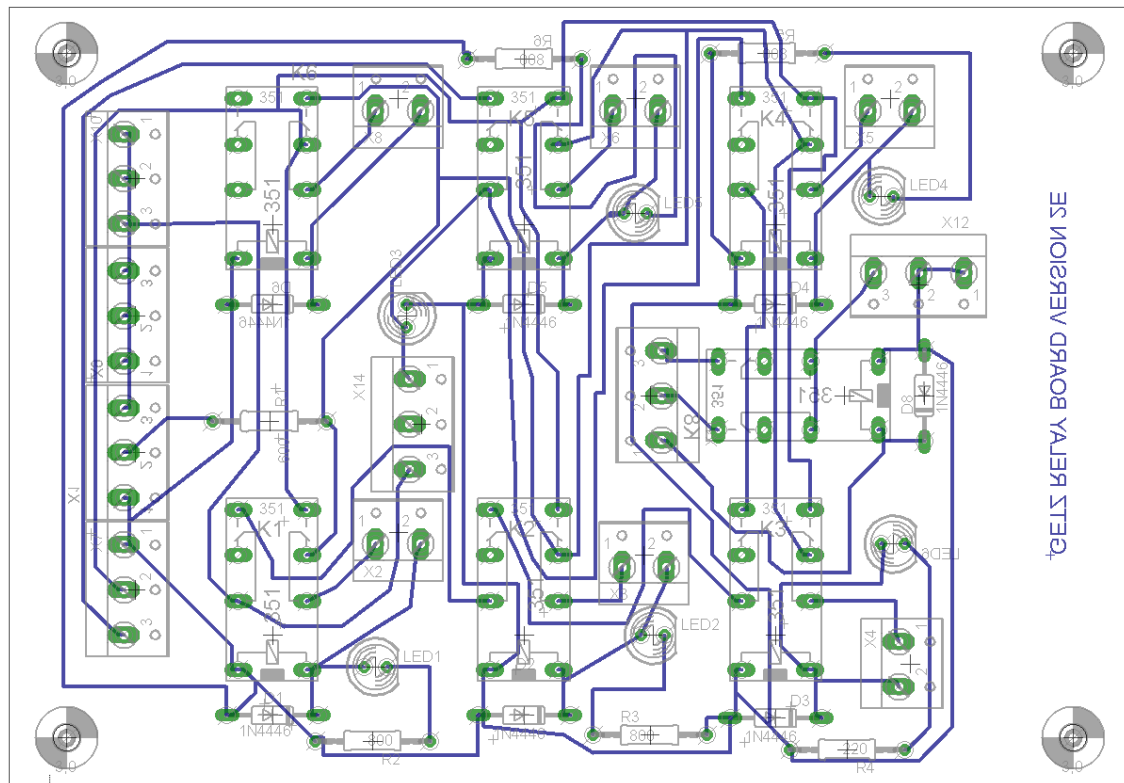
Safety Relay Board 2 PCB Bottom Layer
